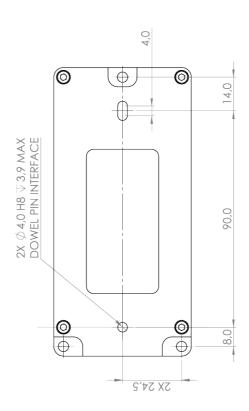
eMRU technical drawings: bottom view (dimensions in millimeters).
